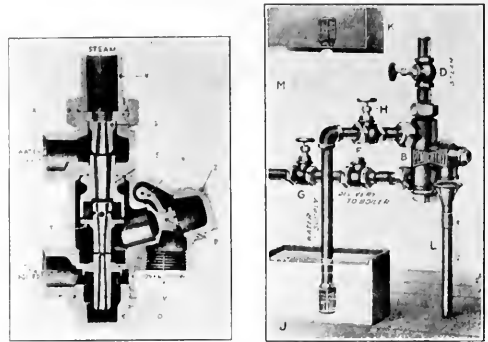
Cross Section View of Penberthy Injector and View of Injector Installed.
